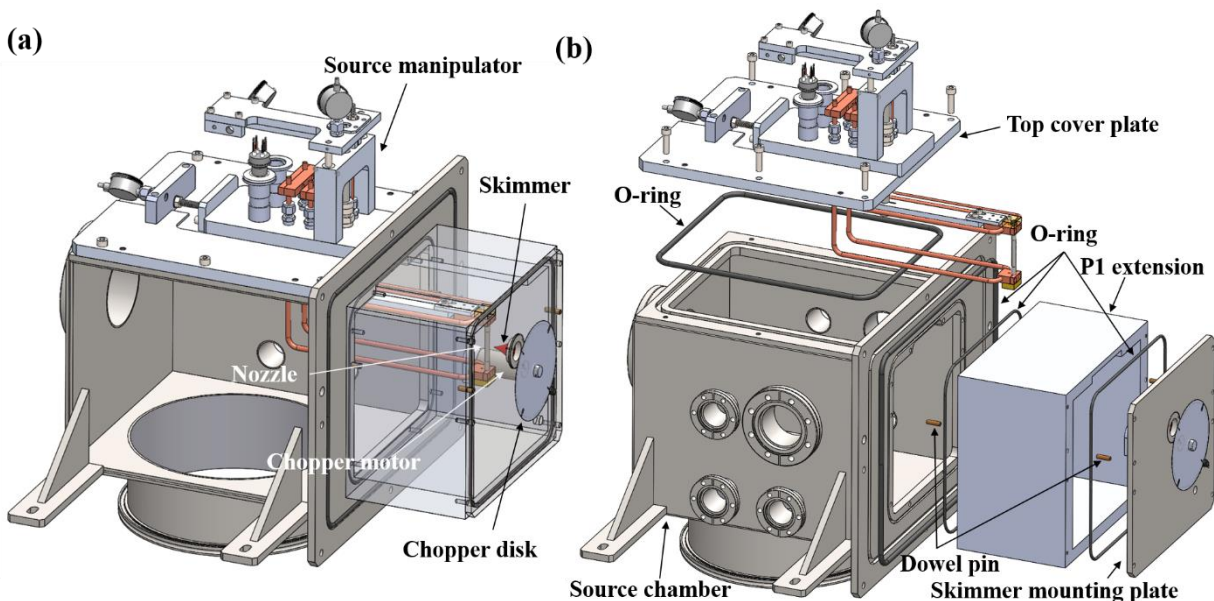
(a) 3D model of the source chamber. For visibility, some parts of the chamber are made transparent. (b) Exploded view of the source chamber assembly. The entire assembly consists of the source chamber, the top cover plate, the P1 extension, and the skimmer mounting plate. The junctions between these parts are sealed by Viton O-rings.
